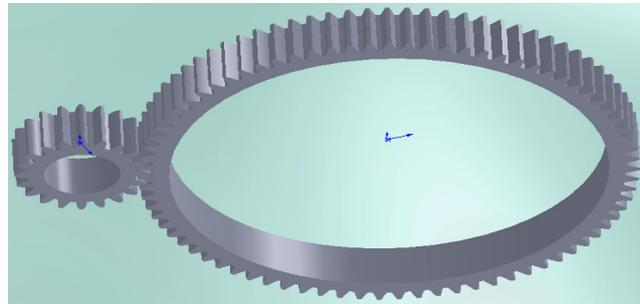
Gearing of a pair of gears inside the series 45 locomotive
